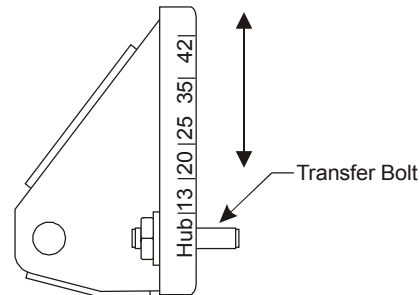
Adjusting the Transfer Bolt (Scaled in Millimeters)
